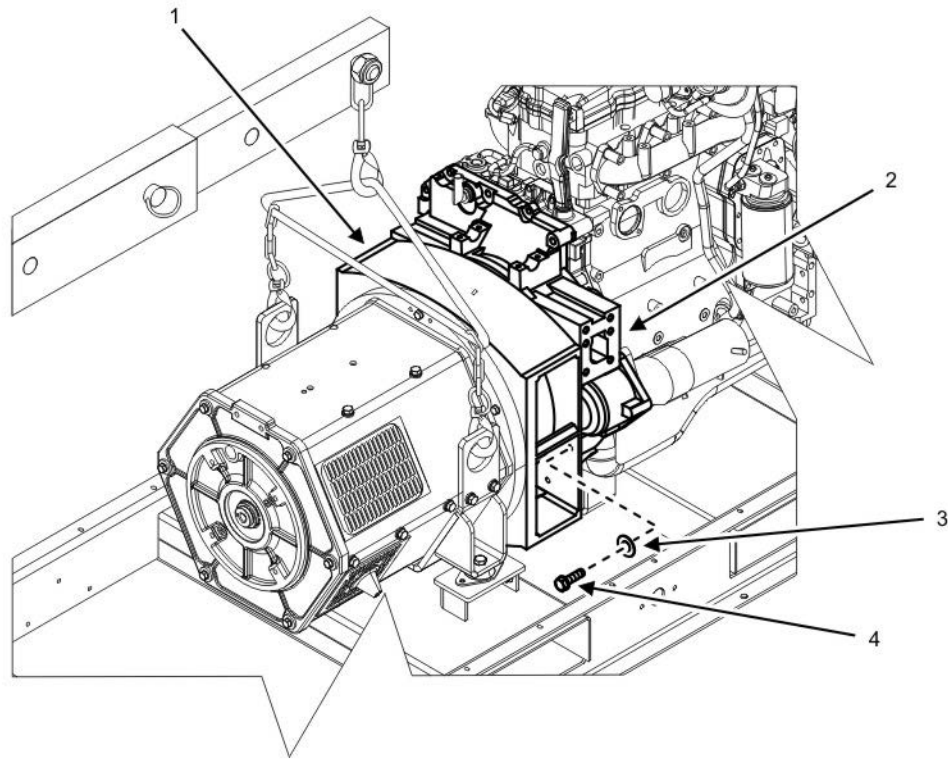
50/60 Hz AC Generator Mounting — Removal.
